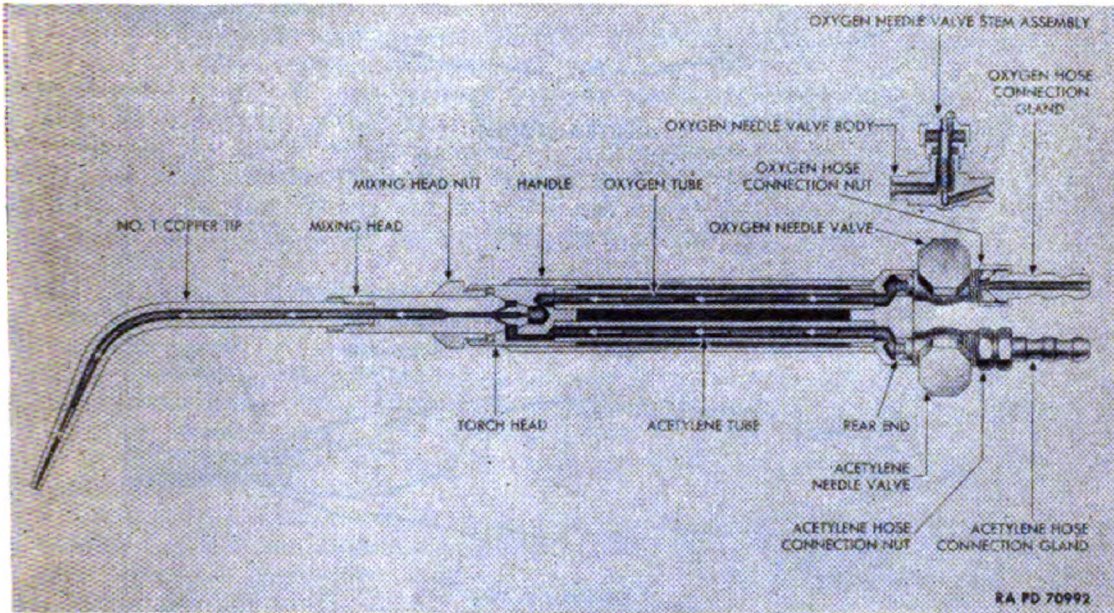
Equal-Pressure, General Purpose Welding Torch.
